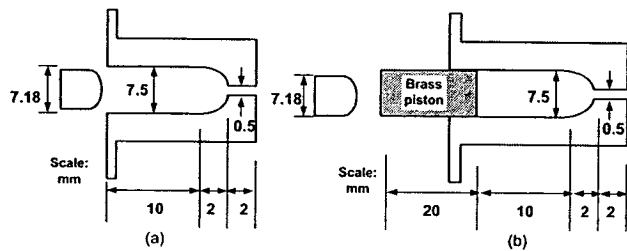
Generation method (a) direct impact (IDM) and (b) momentum exchange (MEM)
